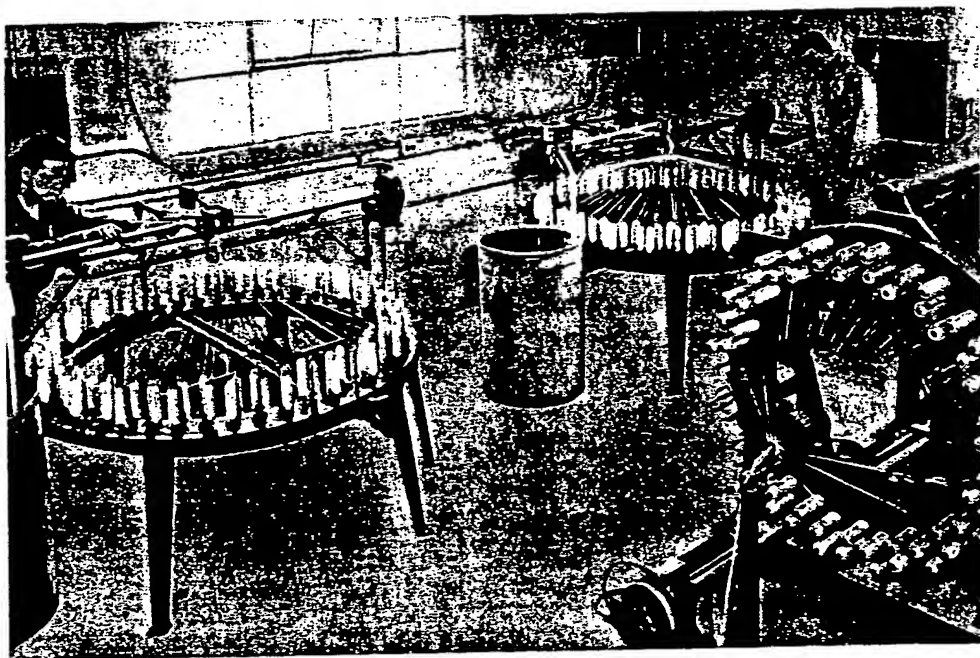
Glass fiber tube manufacturing equipment using braiding machines. (Courtesy of Lamtex Industries, Inc.)
